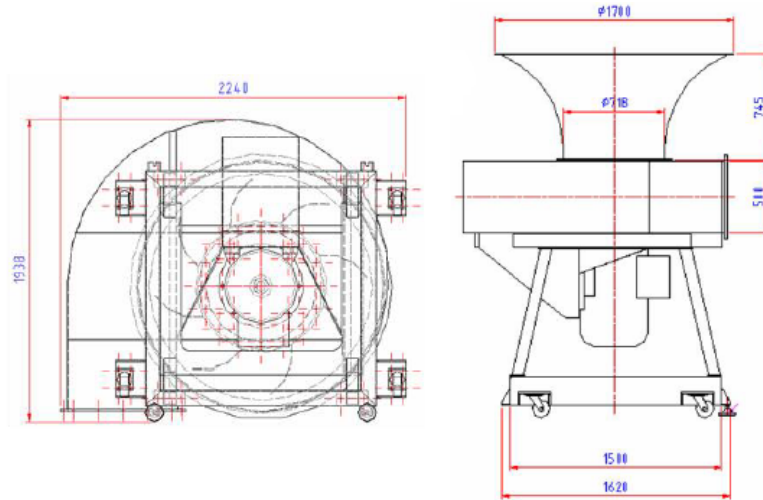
Drawing of the fan installed in the wind tunnel
